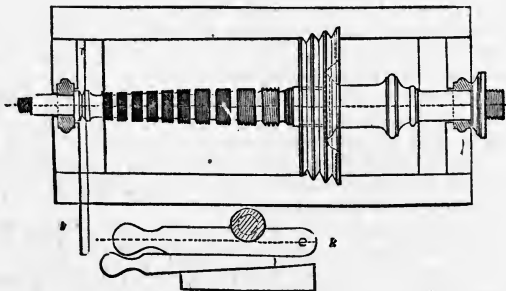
is copied from an old French mandrel mounted in a wooden frame, and with tin collars cast in two parts; the upper halves of the collars are removed to show the cylindrical necks of the mandrel, upon the shaft of which are cut several short screws. In ordinary turning, the retaining key *k*, which is shown detached in the view *k'*, prevents the mandrel from traversing, as its angular
